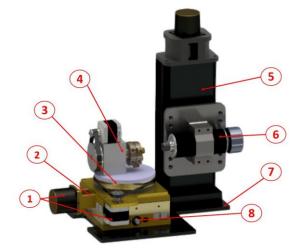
CAD design of CNC machine; 1. Step motors, 2. Z-axis, 3,4. Rotational axis (A,B), 5. Y-axis, 6. Spindle high speed motor, 7. Machine base, 8. Screw of X-axis
